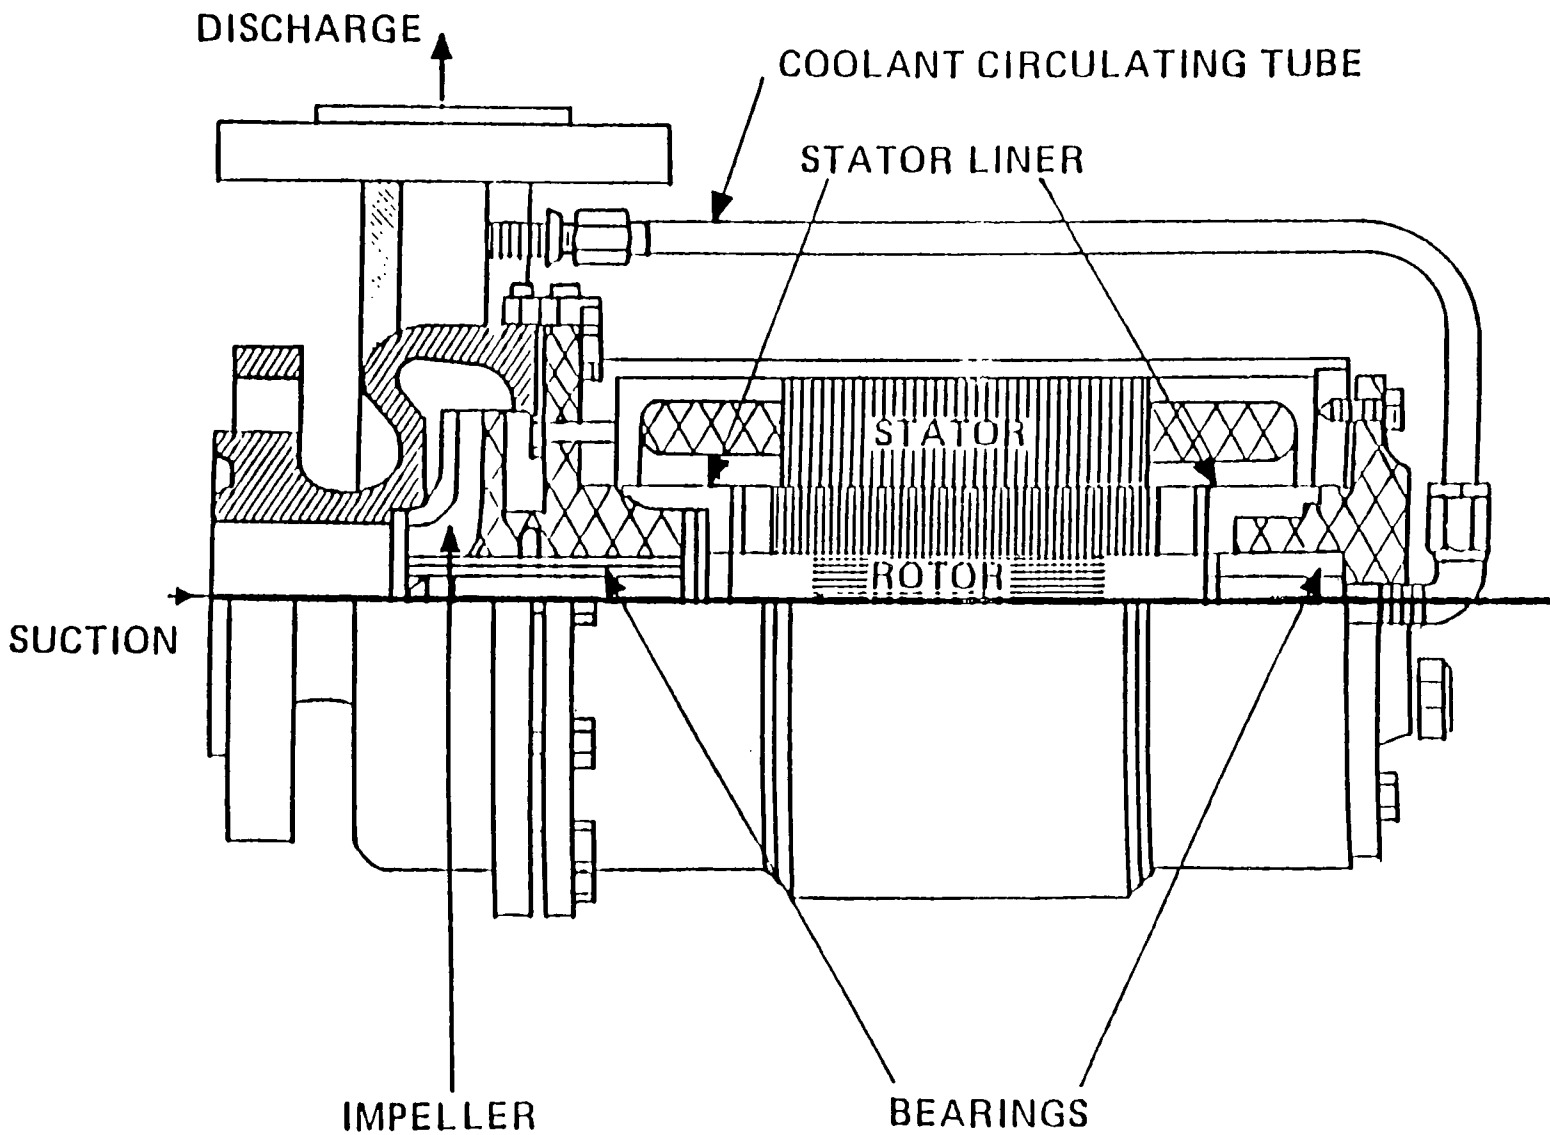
Diagram of Seal-less Canned Motor Pump
